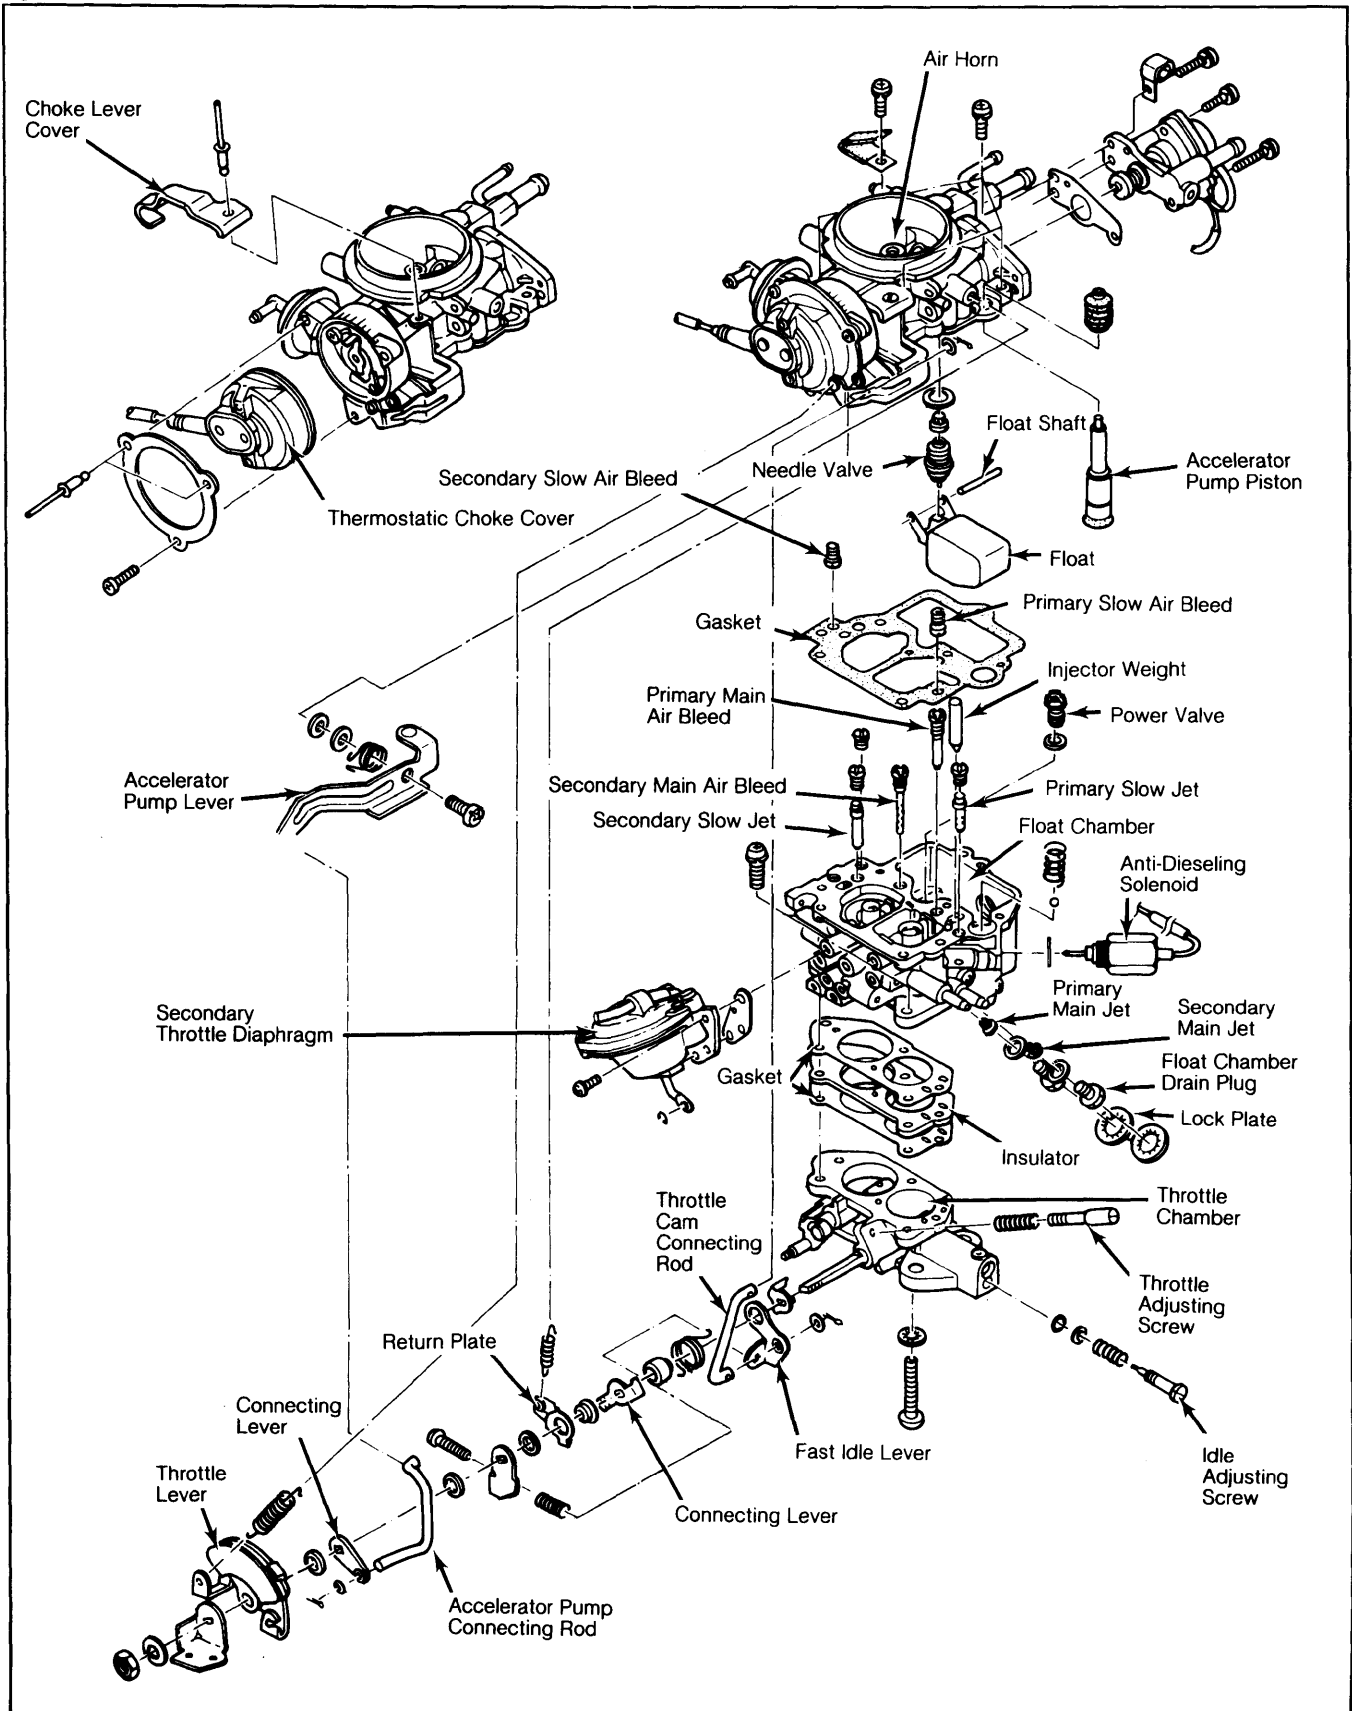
Exploded View of Mazda GLC Hitachi Carburetor
